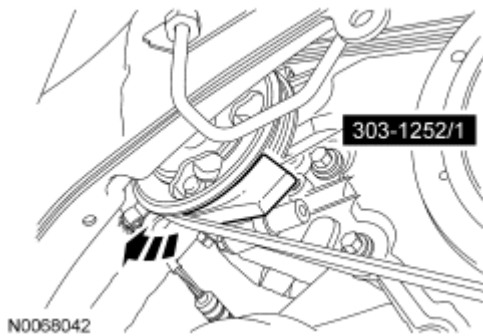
Installing Removal Tool (303-1252/1) Between Belt & Pulley & Turn Crankshaft Bolt Clockwise
